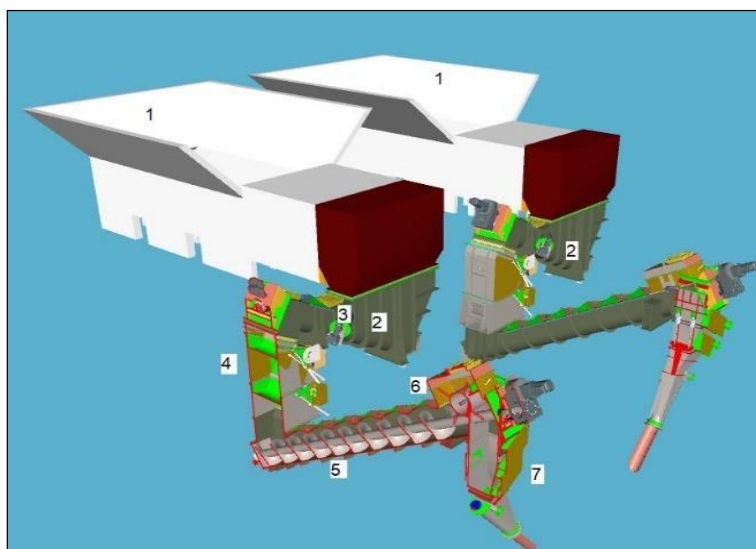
Fuel delivery and dosing system: 1-Short-term storage hoppers with movable floor; 2- Dosing conveyors; 3- Rear conveyors; 4-Double fuel dosing flap; 5- Conveyors with integrated rotary dispensers; 6-Rotary dispensers; 7-Injection dispensers
